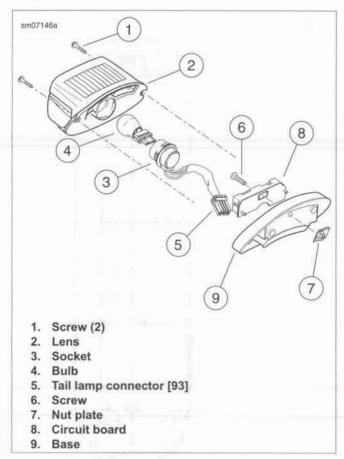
Tail Lamp Assembly: XL 883R/L, XL 1200T
